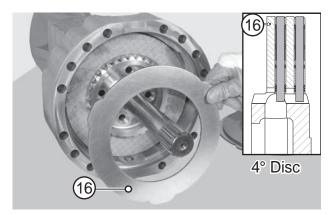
Insert on the flange the discs (16, 15, 14).
